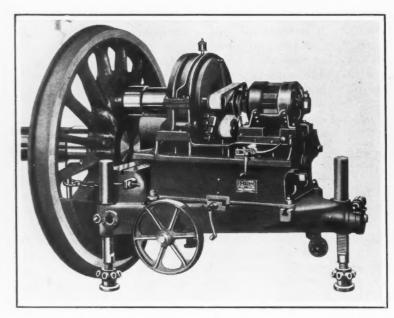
Ready to Grind the Crankpin of a Locomotive Driving Wheel with a Portable Crankpin Grinder
